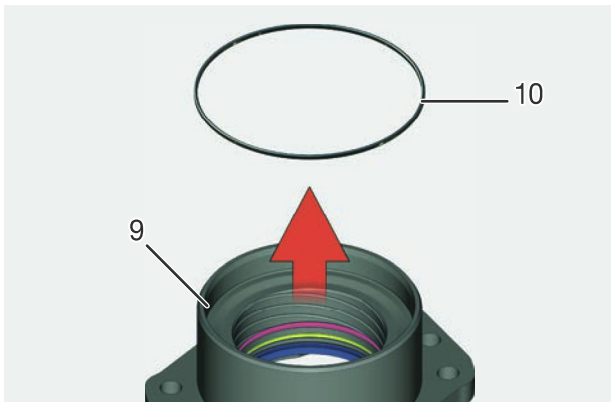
Remove the o-ring (10) from the guide sleeve (9).
